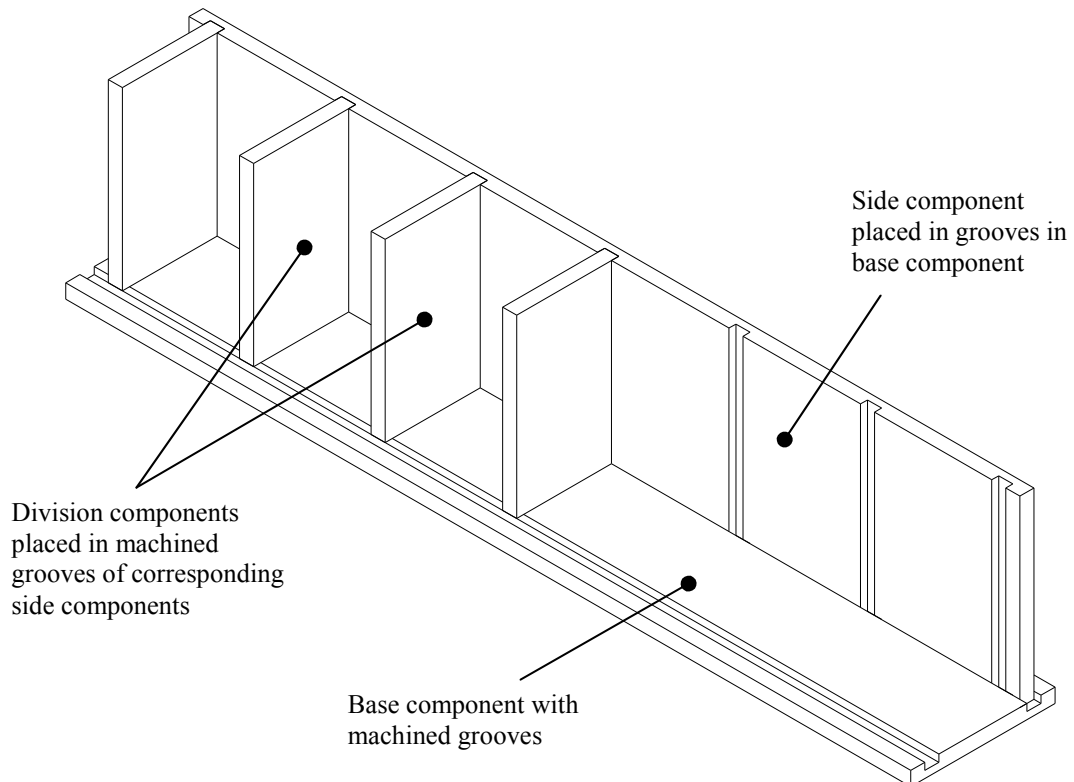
AutoCAD 2006 Isometric view of half assembled mould.
